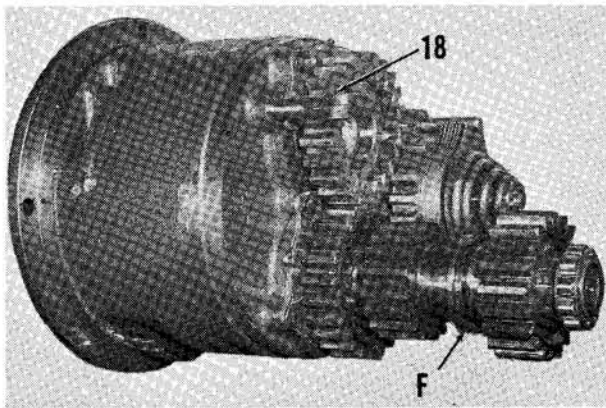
View of rear end of primary gearbox assembly. When reinstalling main shift cover, be sure lower fork (70—Fig. 127) engages both gear flanges (F). Connector (96—Fig. 124) engages hole in shift rail (18).
